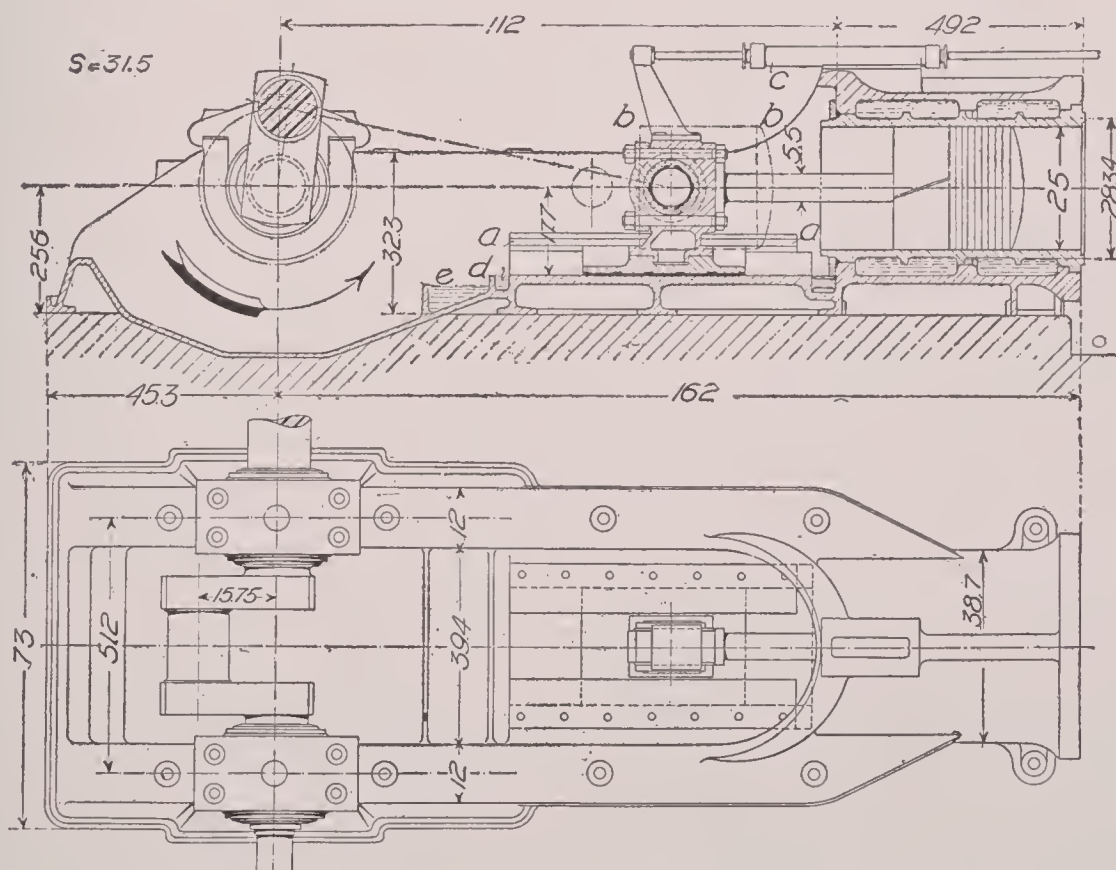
Frame for a 6 H.P. Gas Engine.
